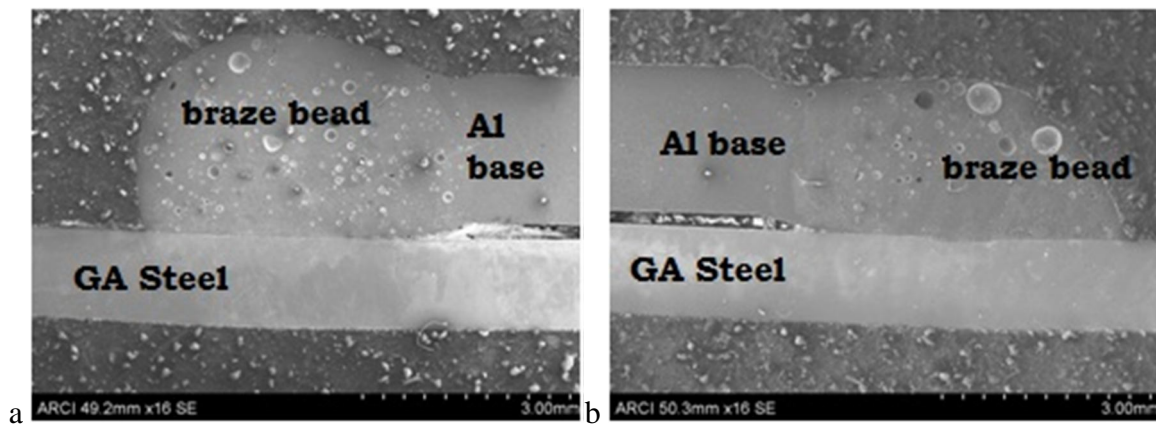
Transverse cross sectional SEM macrostructures of aluminium/GA steel joints.
